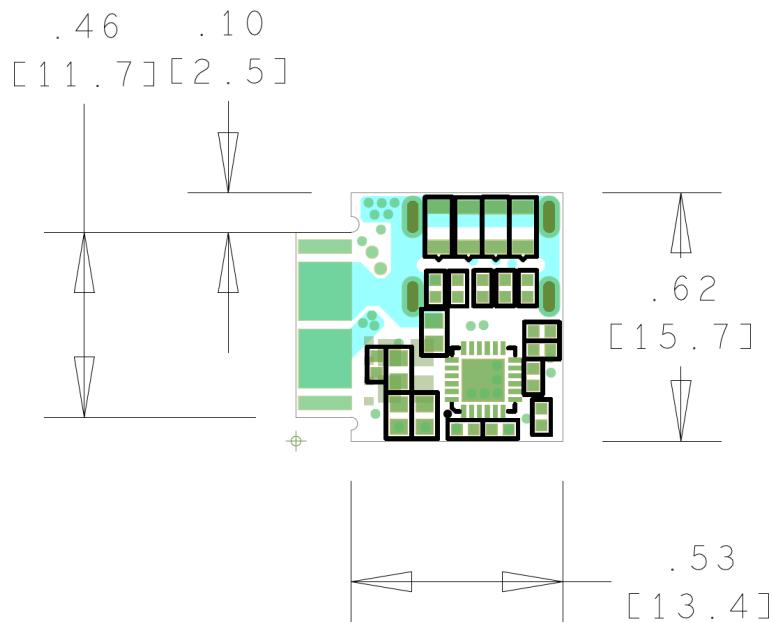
Active Bridge Board Printed Circuit Layout, Top.
